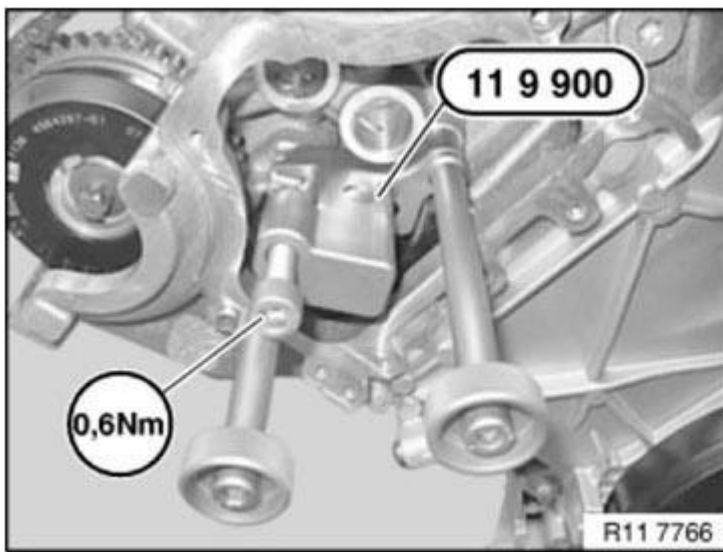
Preloading Hexagon Socket Screw With Special Tool 00 9 250 To 0.6 Nm
